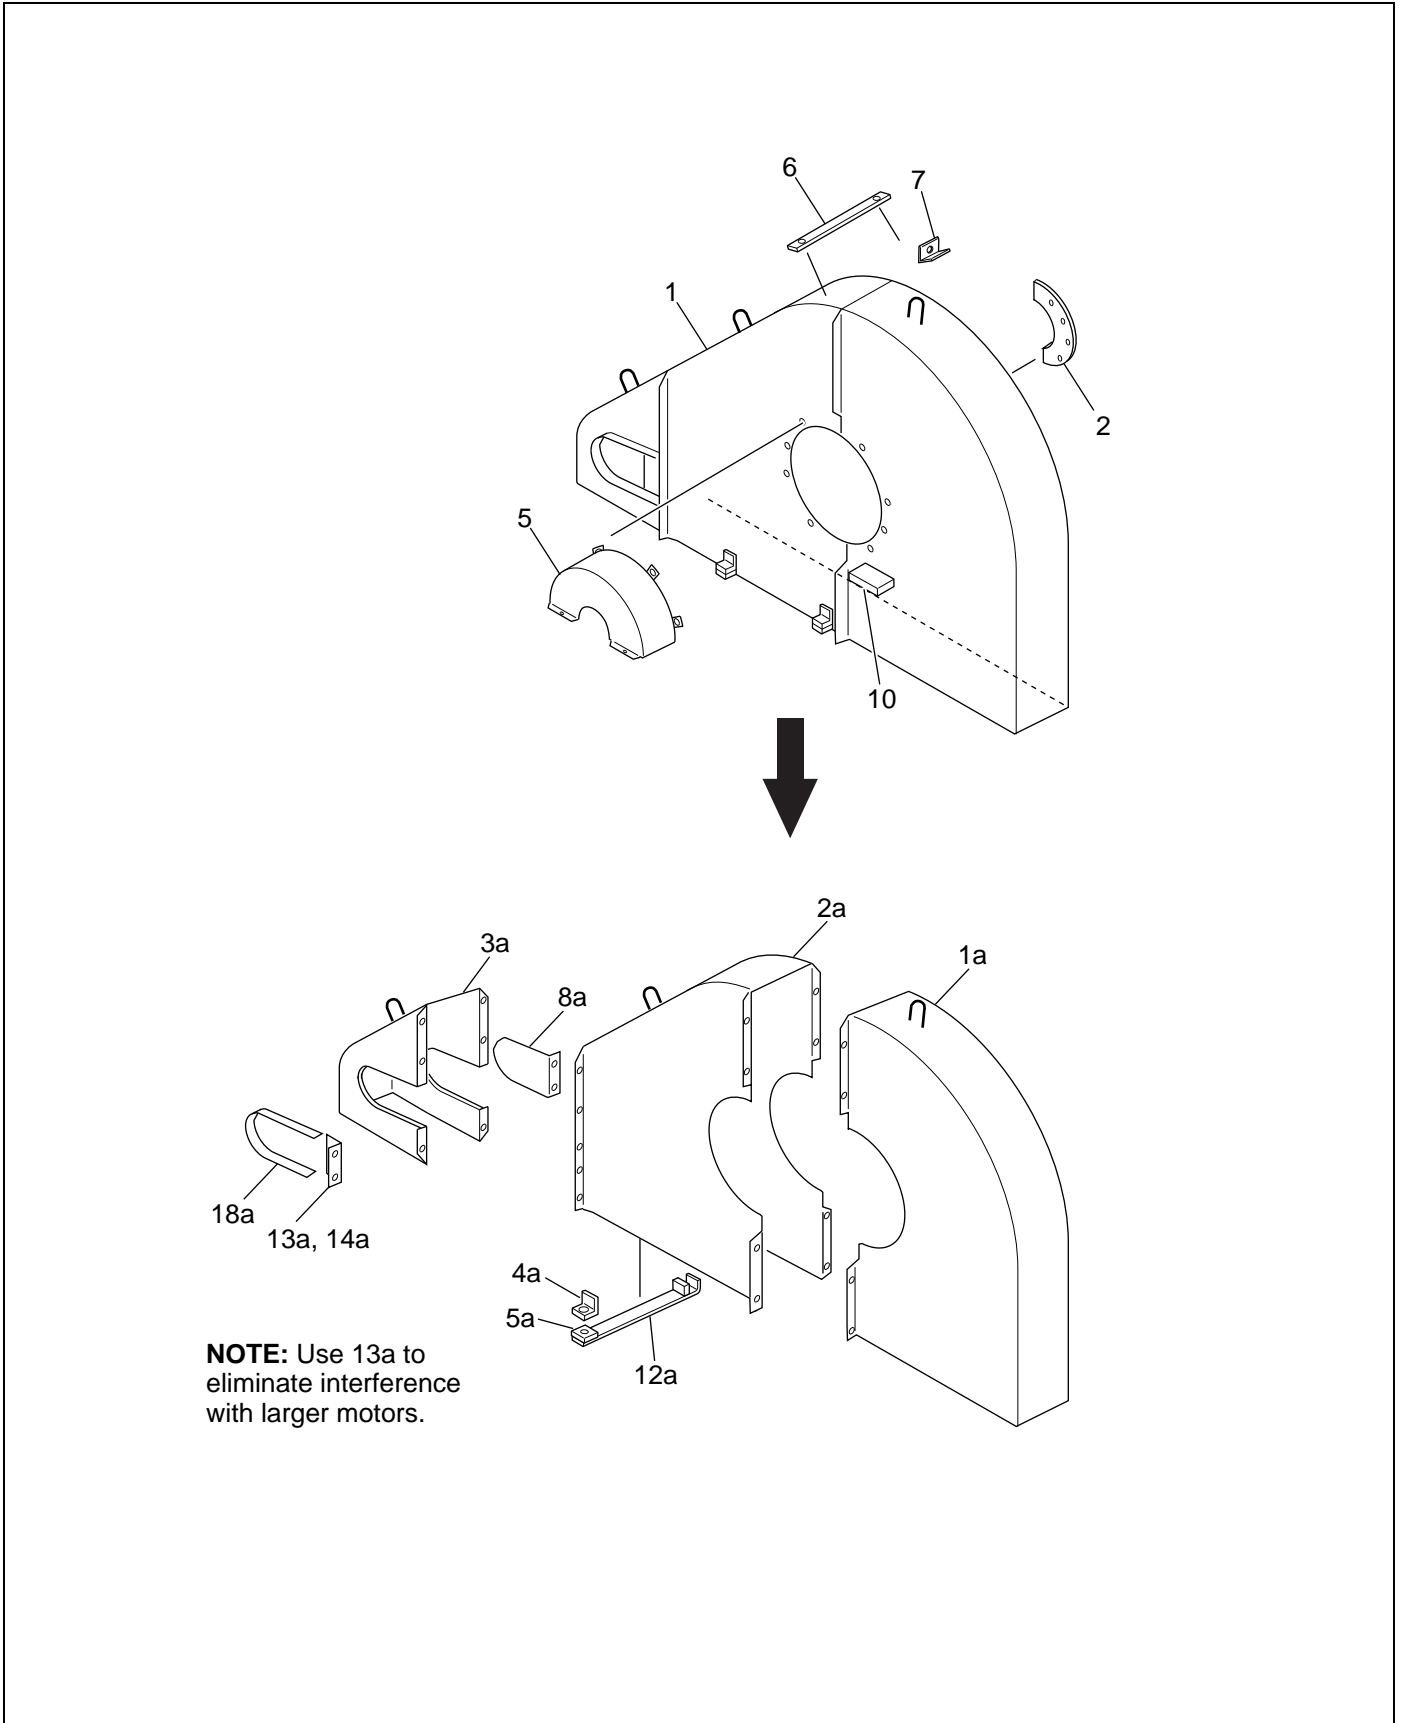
Pulley Guard Assembly (#466290 and #466291)
